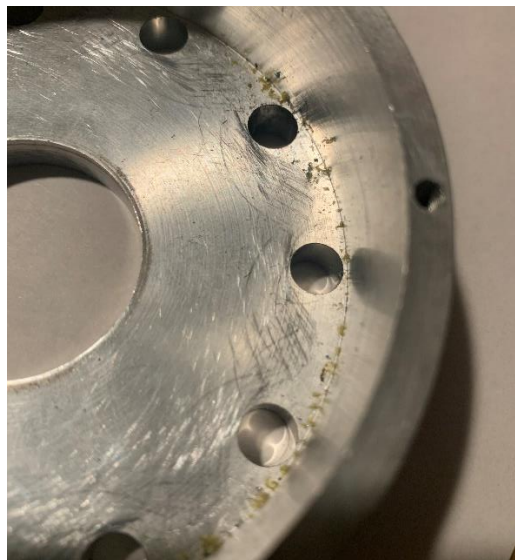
Wear Marks on Gearbox Case from Endurance Testing
